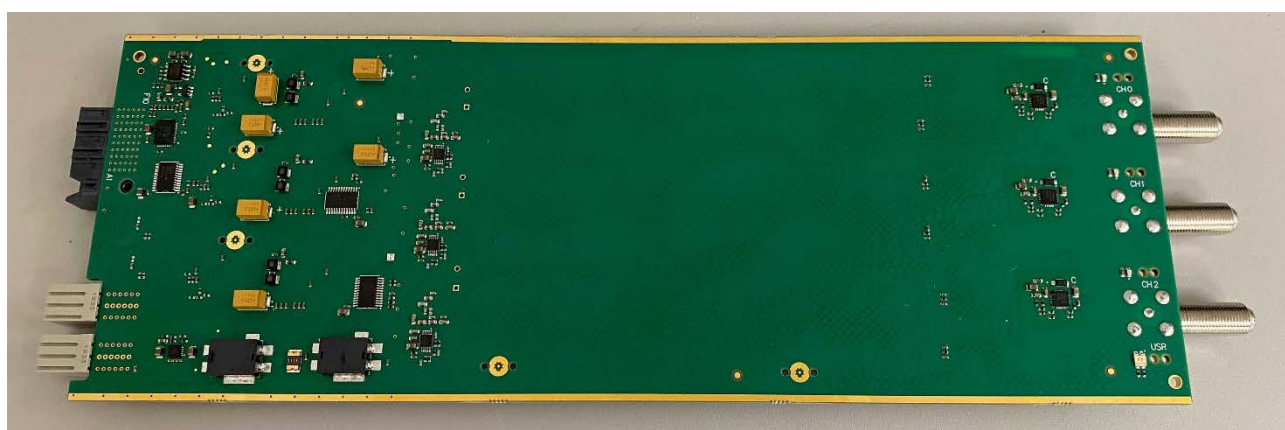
Photo of RCU2L PCBA BOTTOM VIEW
